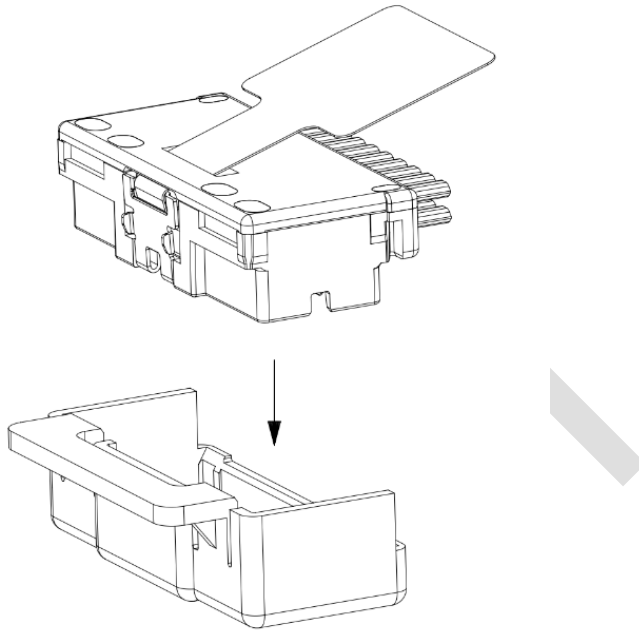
Free-Side Connector & Dust Cover Assembly Direction
